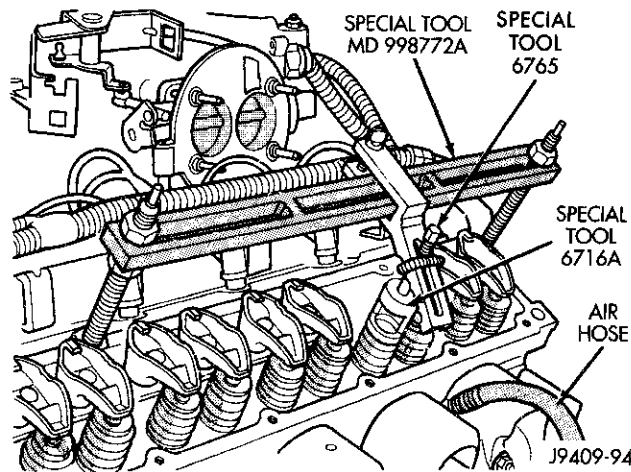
Valve Spring Compressor MD-998772A with Adaptor 6716-A and Screw 6765
